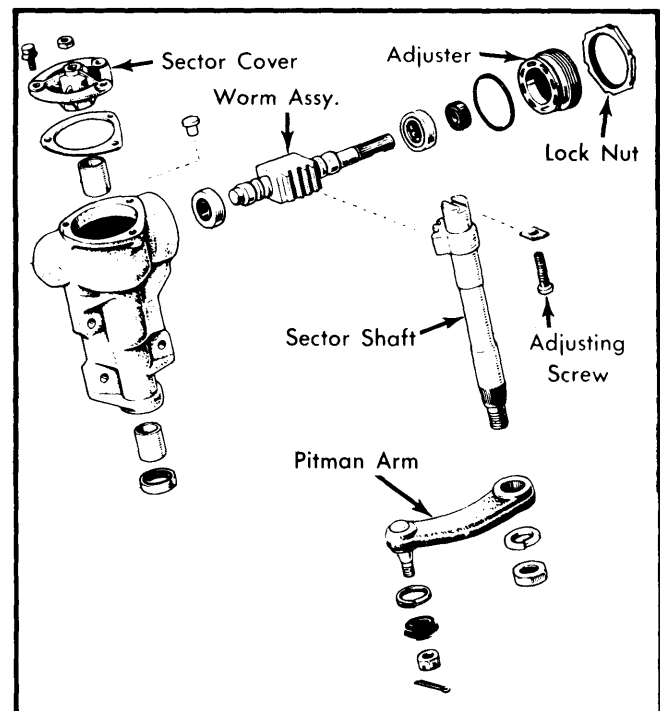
Exploded View of Recirculating Ball Type Steering (Corona Shown, Others Similar)
